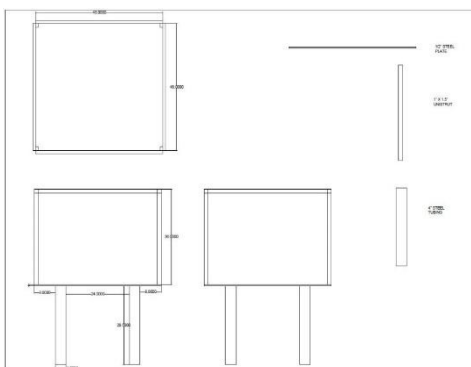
Design of the robot worktable with mounting strut for the welding light curtain.
